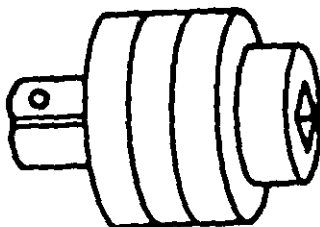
Type IV, class 5, style B attachment, adapter, ratchet, socket wrench.
